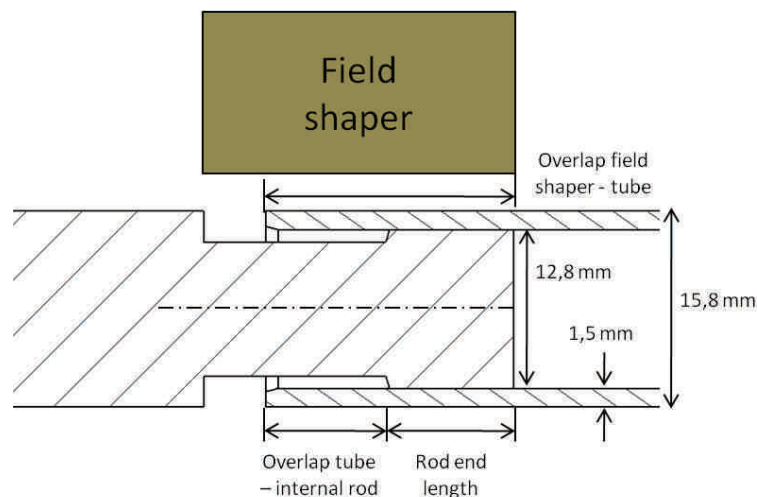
Industrial case study: axially loaded steel to steel crimp joint
